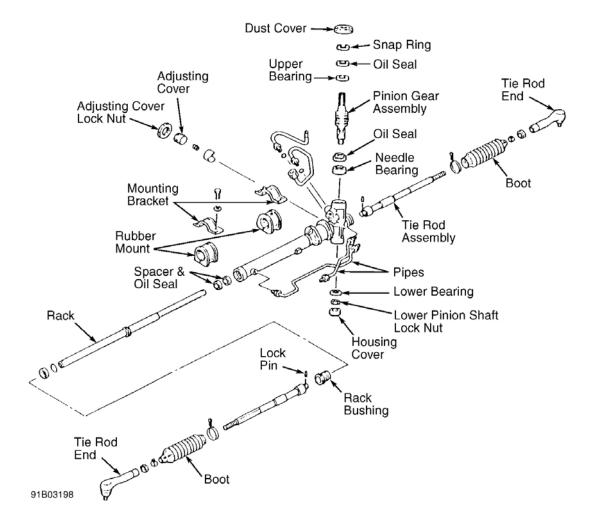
Rack & Pinion Steering Gear (Miata) Courtesy of MAZDA MOTORS CORP.
